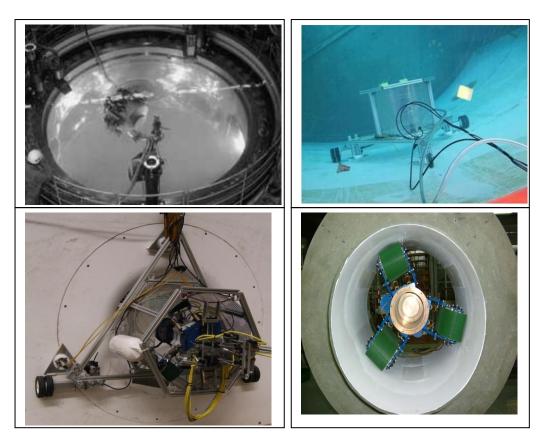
Nuclear pressure vessel and nozzle weld inspection with the RIMINI wall climbing and pipe crawling robots
